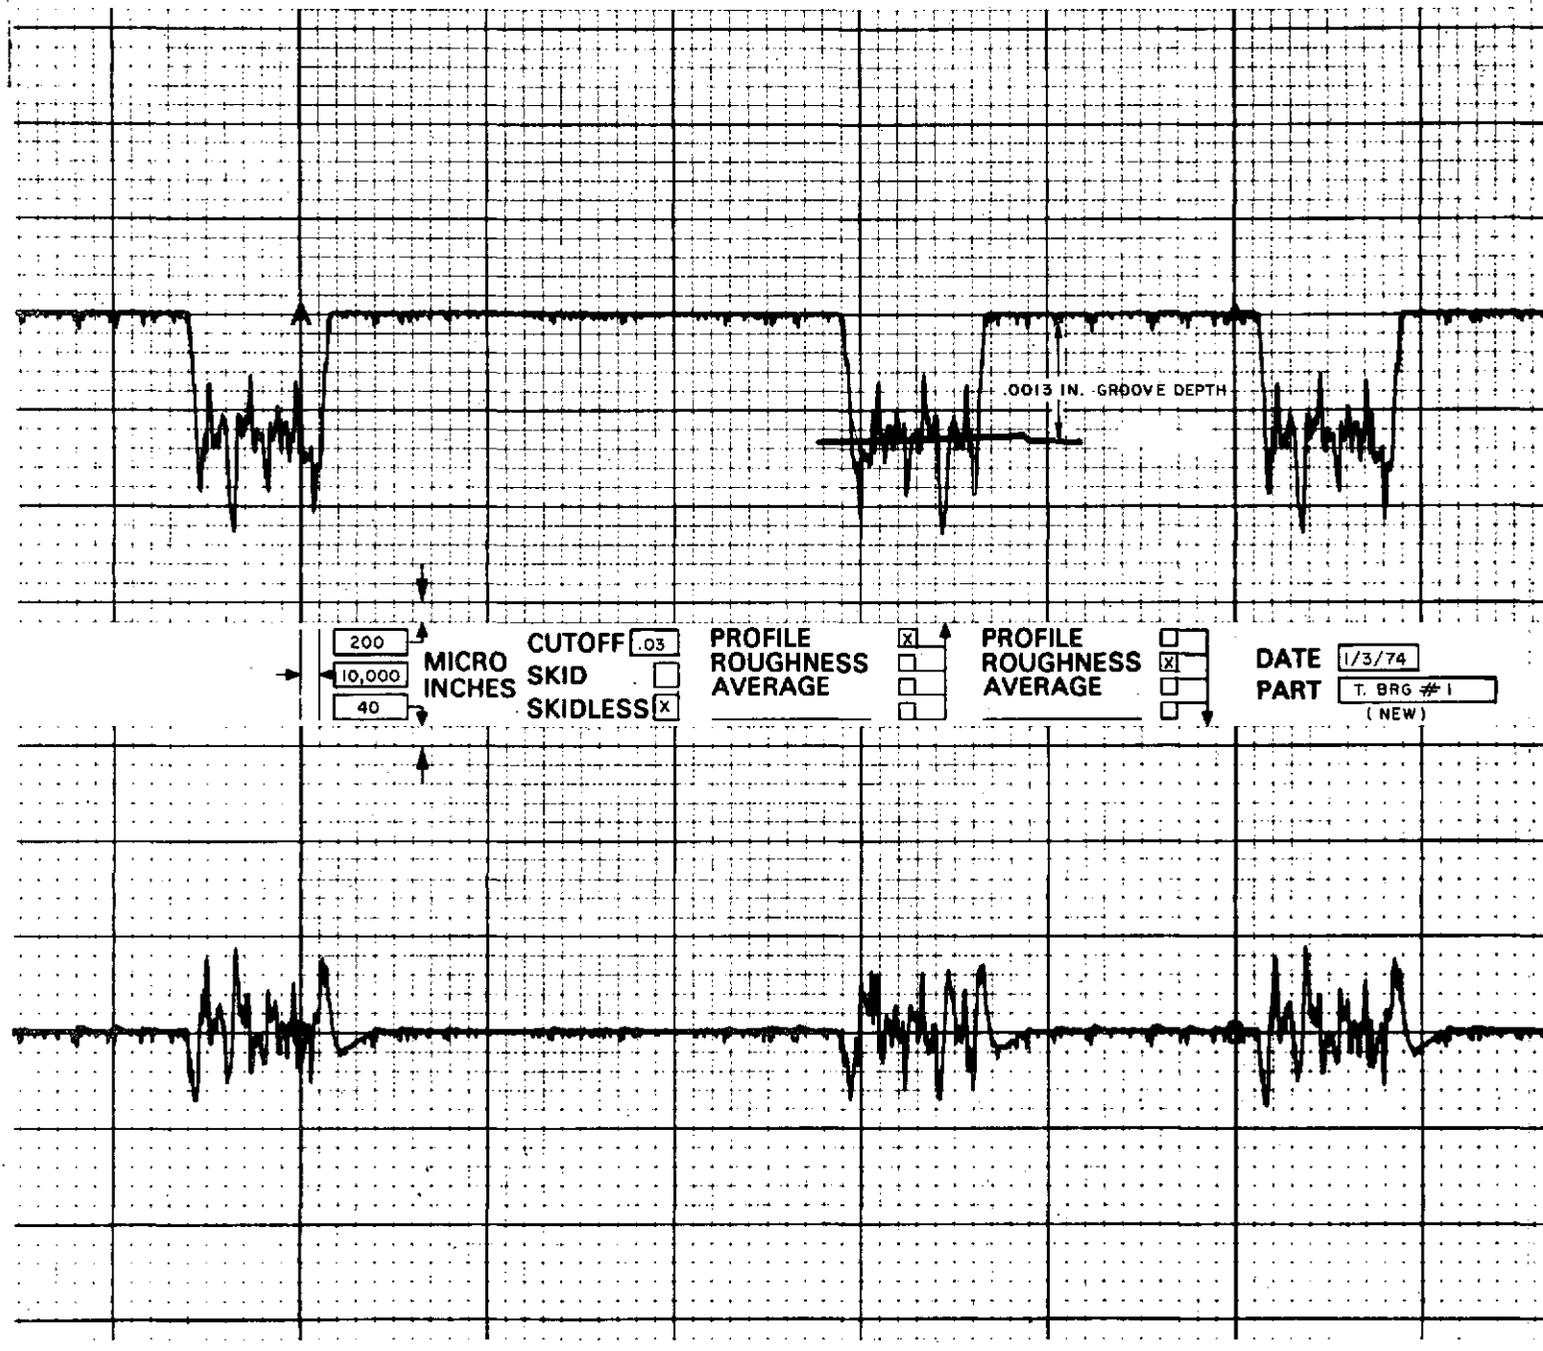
Groove Depth, Thrust Bearing #1 Before MoS₂ Coating
